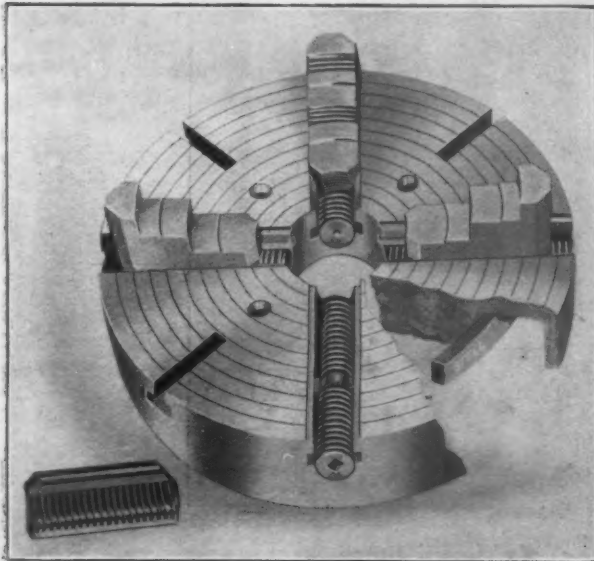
Broken View Showing the Steel Reinforcing Ring in the New Independent Jaw Lathe Chuck Made by the Oneida National Chuck Company, Oneida, N. Y.
